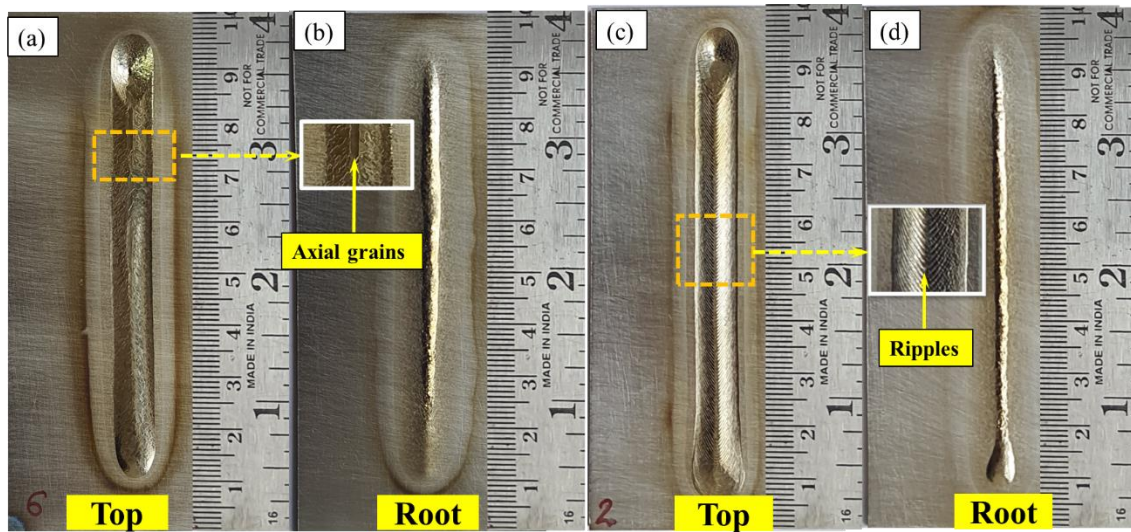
Bead on plate welding on Ti-6Al-4V: (a, b) top and root side of the weld prepared using conventional GTAW; (c, d) top and root side of the weld prepared using p-GTAW
